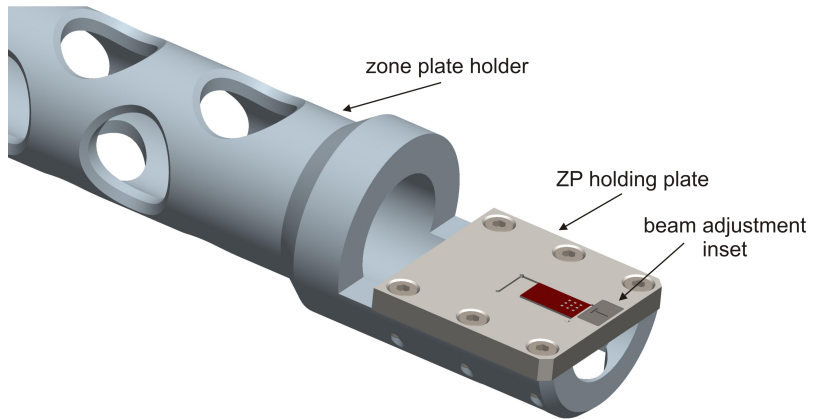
Schematic representing the assembled *zone plate holder*. The *zone plate chip* is attached onto the *ZP holding plate* which is mounted by six hexagonal socketed screws.
